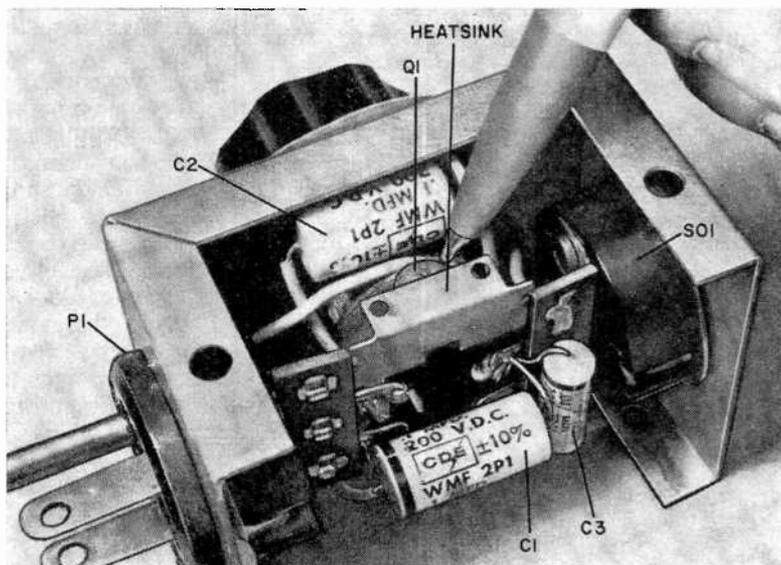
Once Q1 is properly soldered to heatsink according to directions, set heatsink tabs onto lugs of terminal strip; solder in place.
